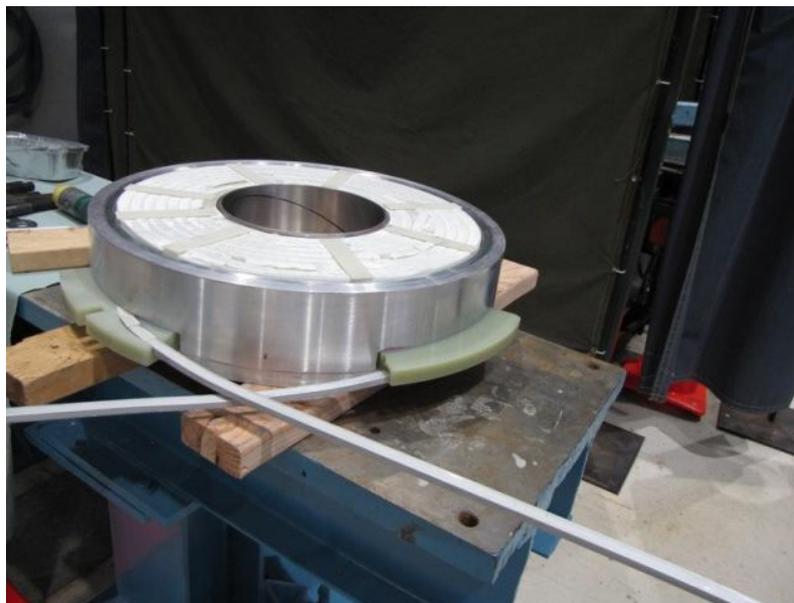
Final test coil assembly with AISI1010 steel top plate removed
